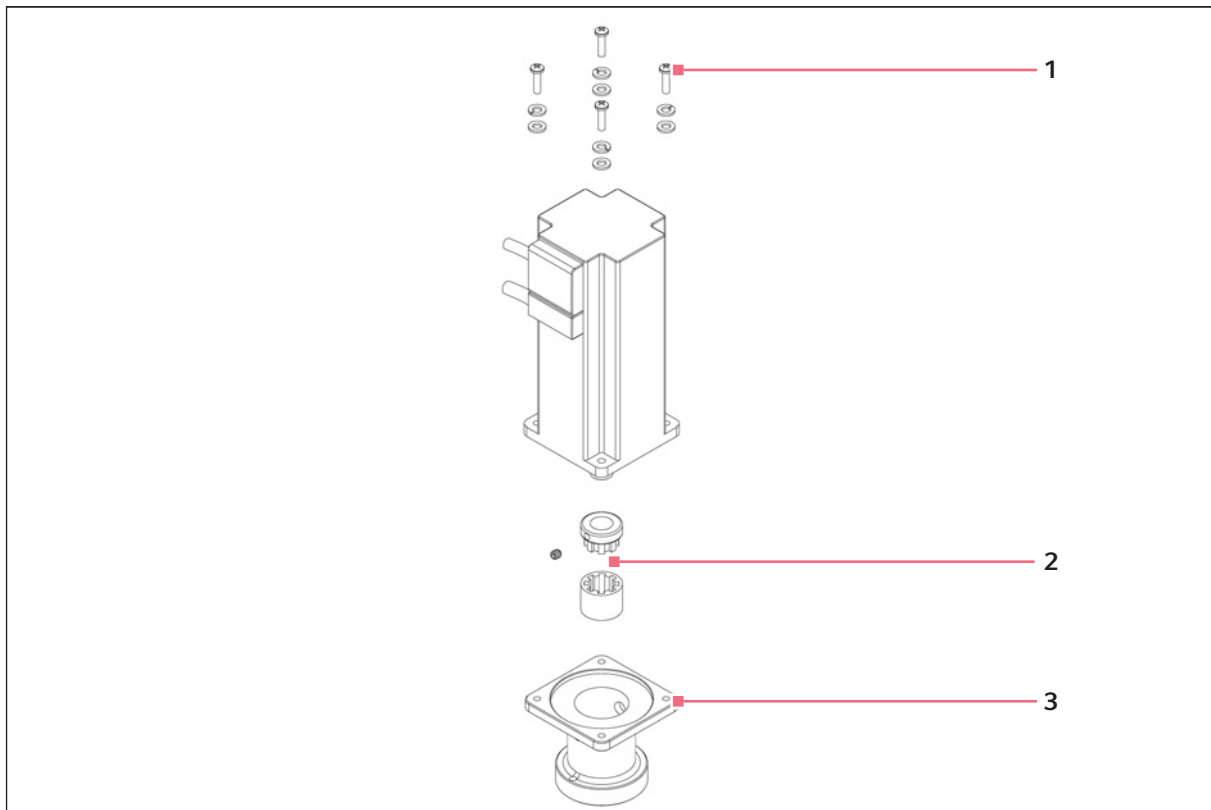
BioFlo 320 motor assembly (exploded view)
